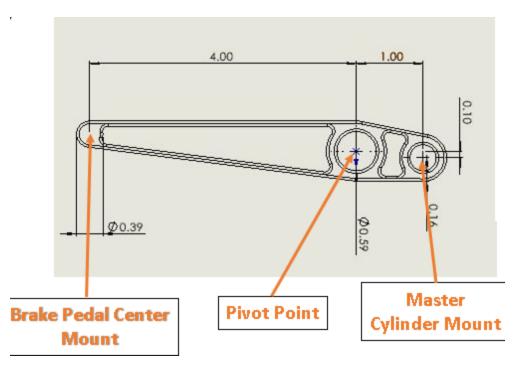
SolidWorks Drawing of Anticipated Pedal Dimensions
